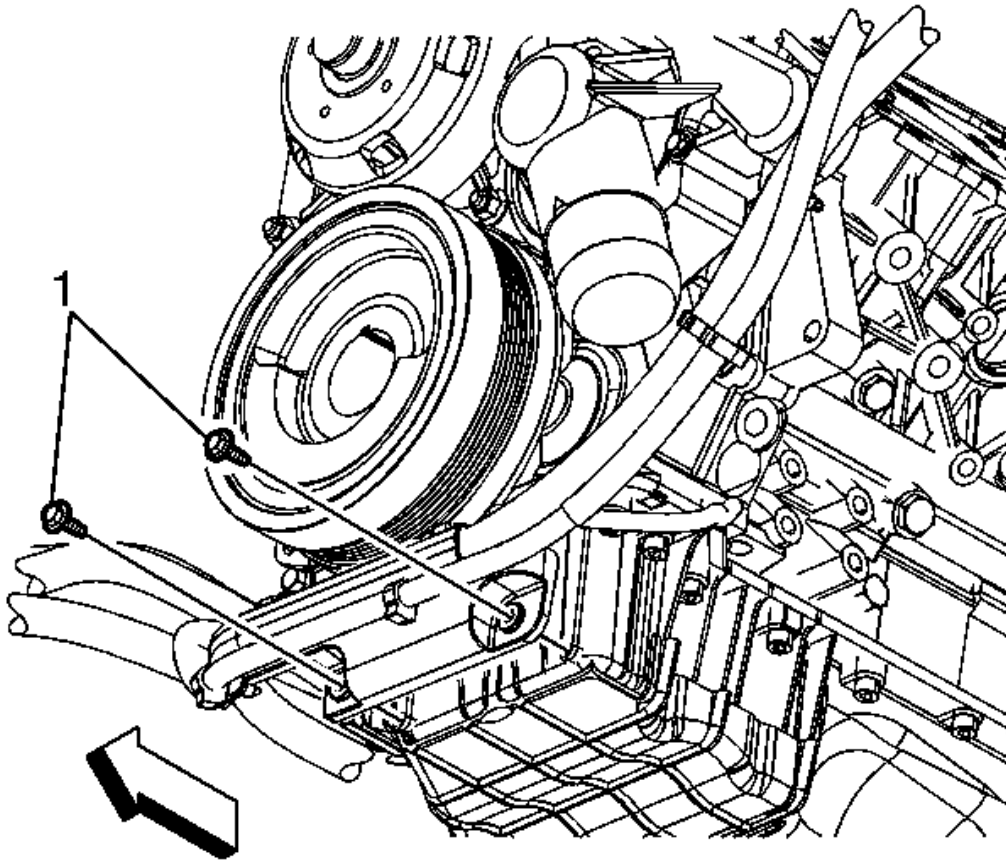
View Of Starter Solenoid Cable Channel Bolts
